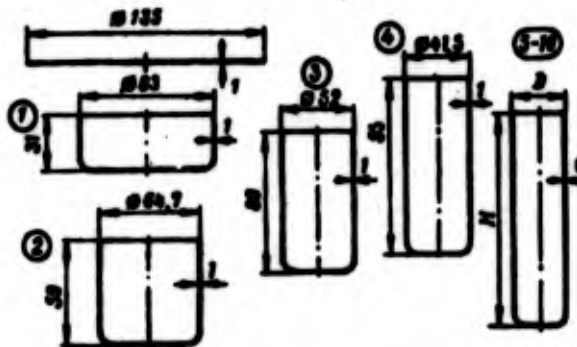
Operation sketches of the drawing of the billet of a bellows.
